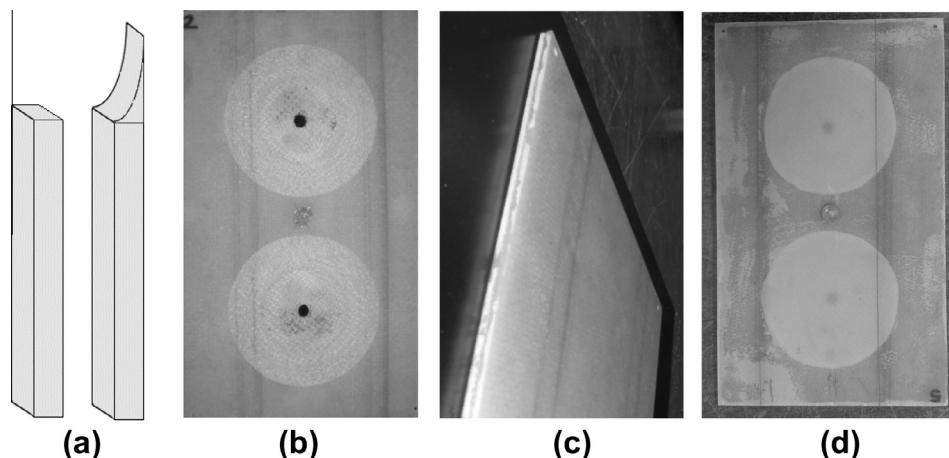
(a) Strip with and without a wedge, (b) plate (6 mm) containing two 2D acoustic black holes, (c) combined composite plate (6 mm), and (d) composite panel (6 mm).
